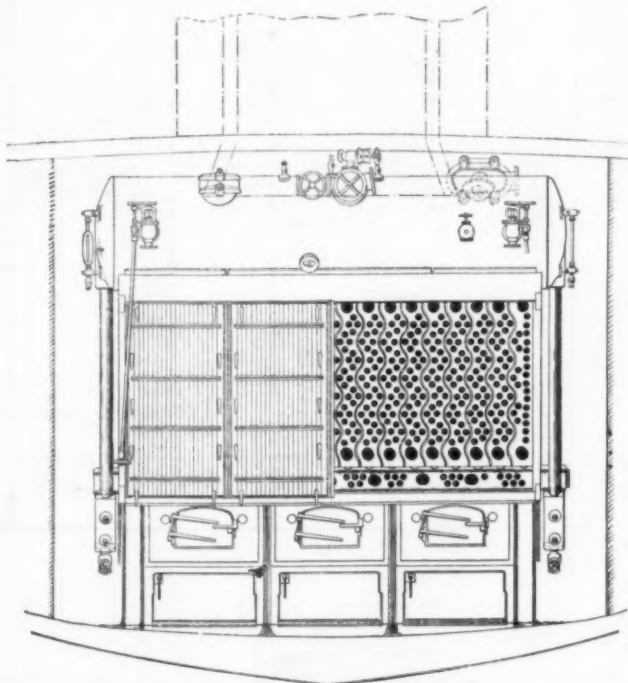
BABCOCK AND WILCOX BOILER WITH PART OF FRONT CASING REMOVED, SHOWING ARRANGEMENT OF TUBES IN HEADERS.
